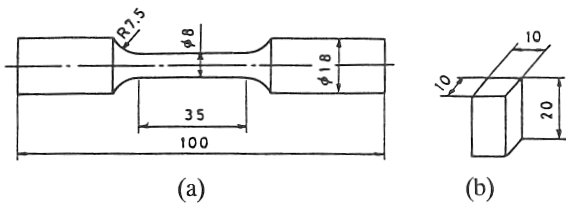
Shape and dimensions of tensile test specimen(a) and compression test specimen(b) in mm.
